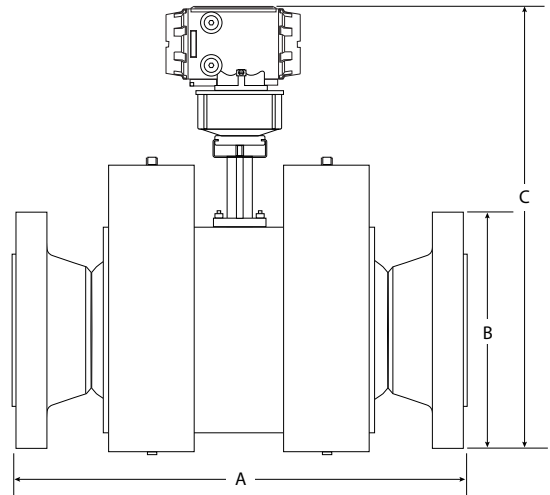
B: Dimension Key for DN400 and larger (16-in and larger) Meters with Dual Transducer Shrouds (See tables 9A and 9B)
